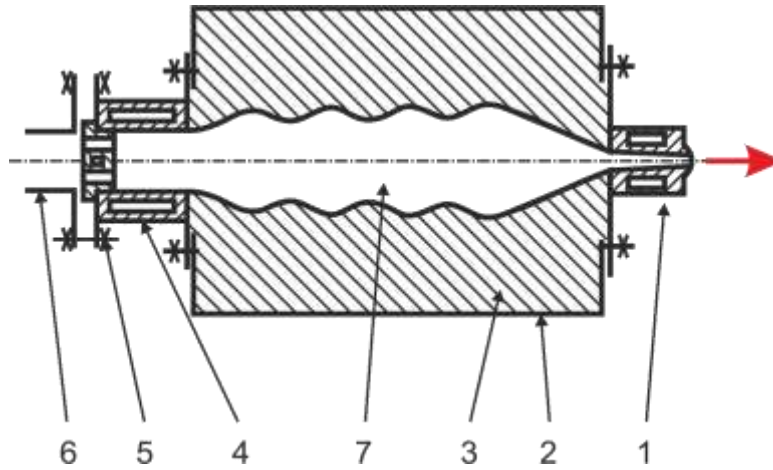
Blow burner: 1 - metal water-cooled blow nozzle, 2 - combustion chamber casing, 3 - lining, 4 - water-cooled adapter, 5 - safety burner plate, 6 - gas and air mixture supply, 7 - burner combustion chamber
